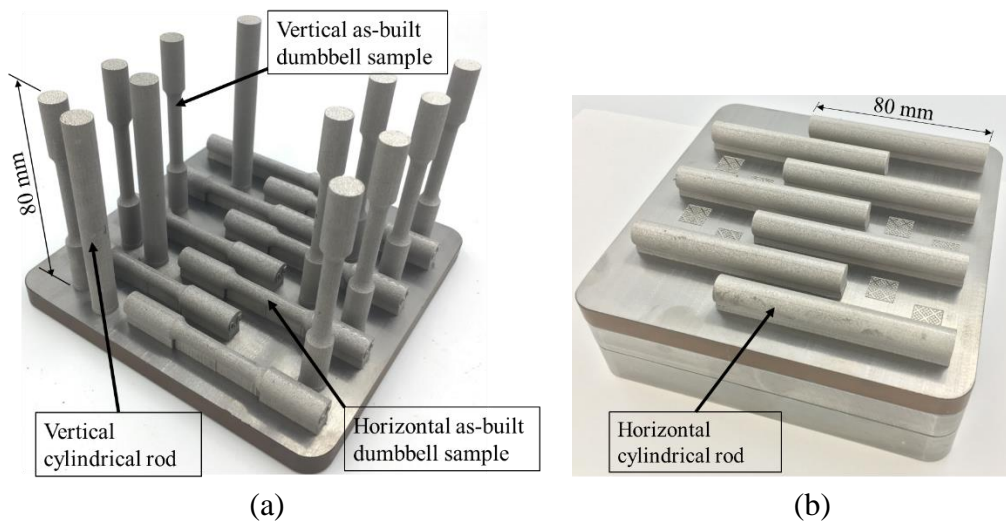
L-PBF fabricated dumbbell shape tensile and cylindrical bars on the substrate plate, a) horizontal and vertical dumbbell tensile samples and a few vertical cylindrical bars and b) horizontal cylindrical bars.
